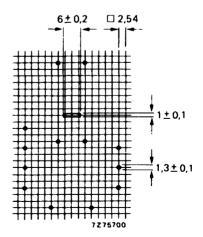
Hole pattern for mounting on a printed-wiring board (solder side).
